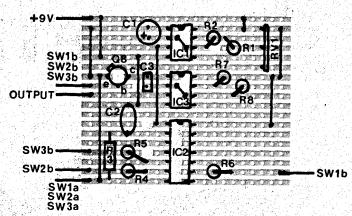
, Veroboard pattern. The tracks should be cut as shown. Full size 47 x 55 mm.
